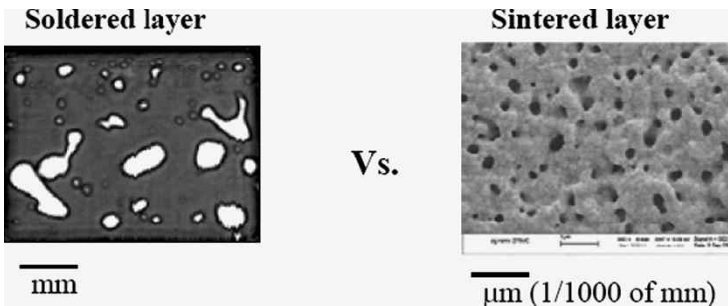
Microstructure comparison of solder and sintered nano-Ag paste die attach layers: Sintered nano-Ag showed uniformly distributed micron-sized voids; solder layer showed much larger voids
